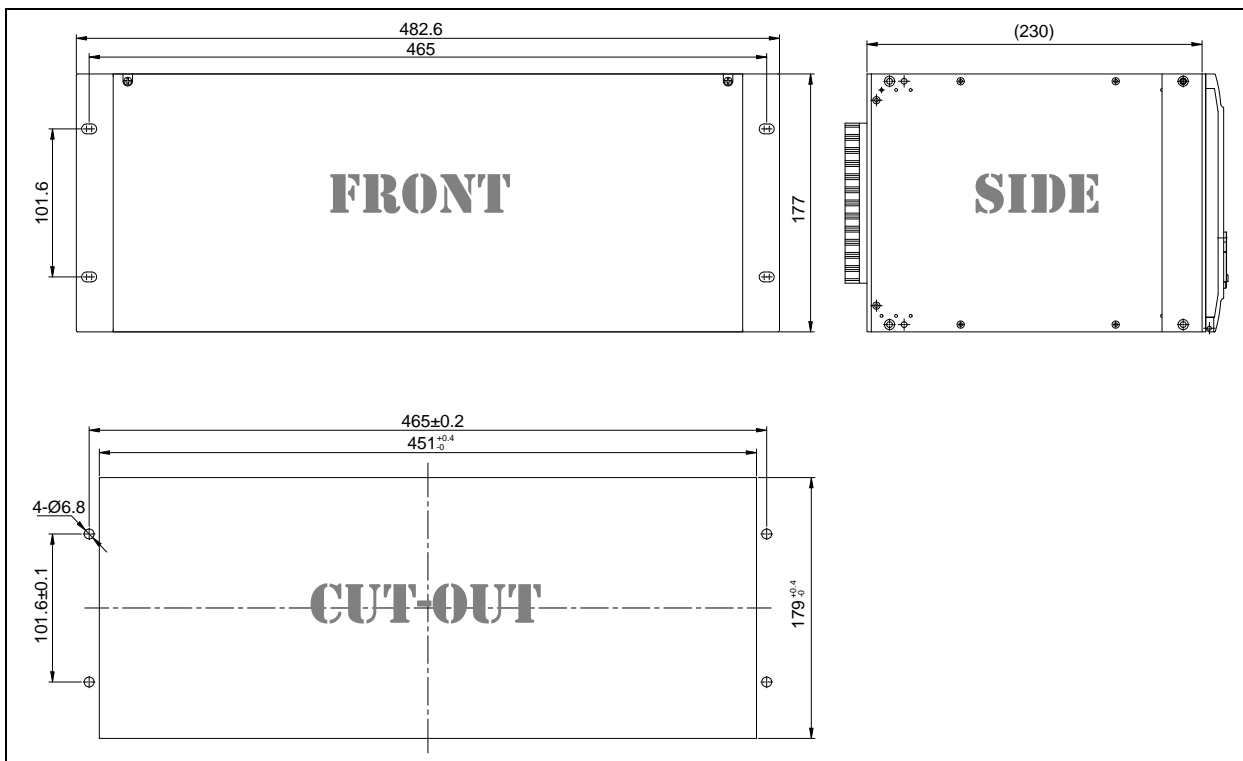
Dimensions of full width PCS-9705 (unit: mm)
